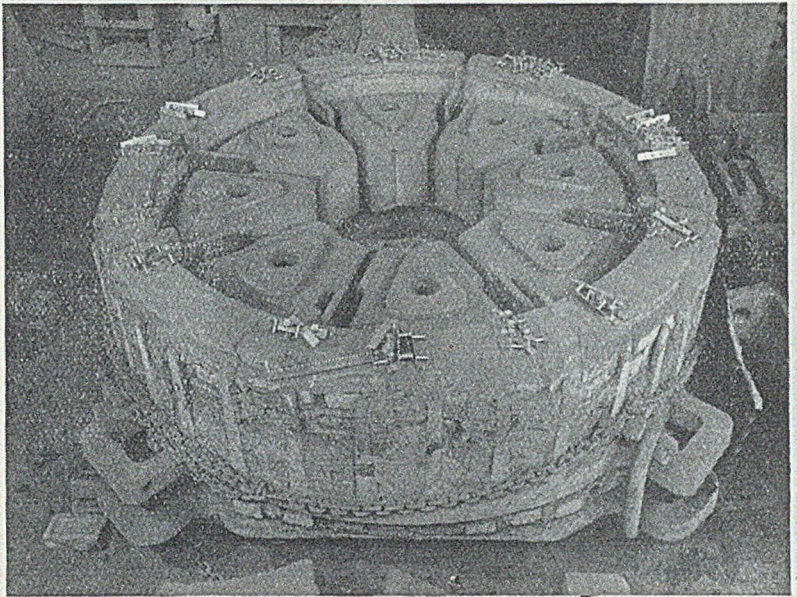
Loam Mould for a 5-ton Gear-wheel Centre being Cored-up.
